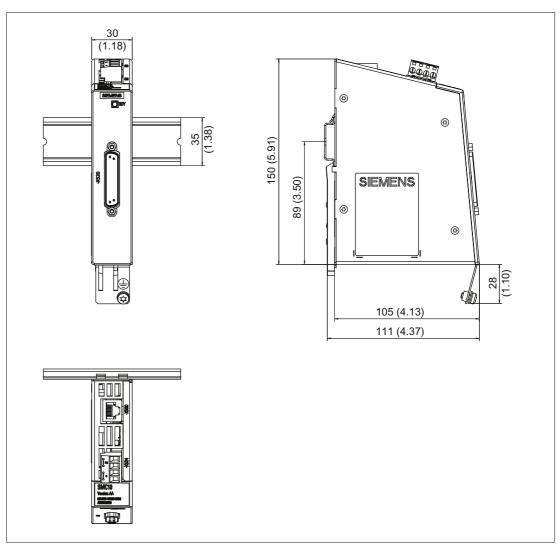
Dimension drawing of the Sensor Module Cabinet SMC10, 30 mm wide, all data in mm and (inches); order number: 6SL3055-0AA00-5AA3
